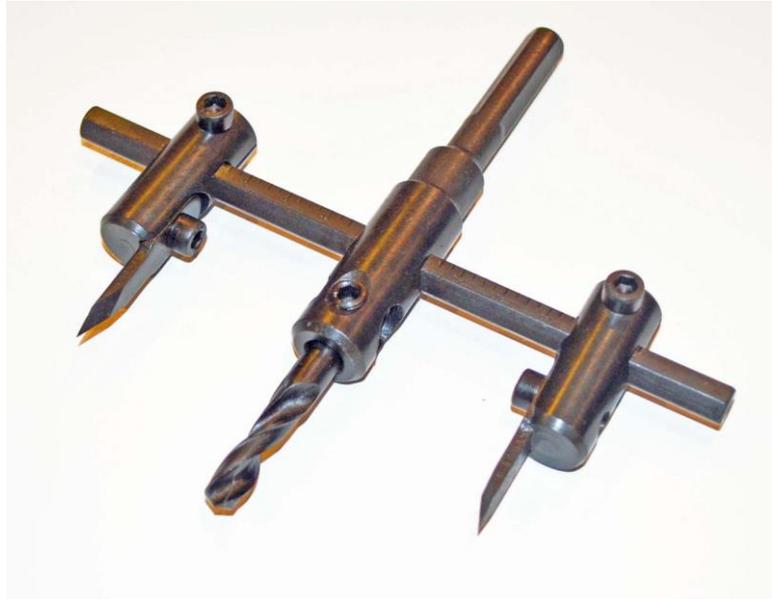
A hole cutter set for a minimum size hole (Hole Cutter).
